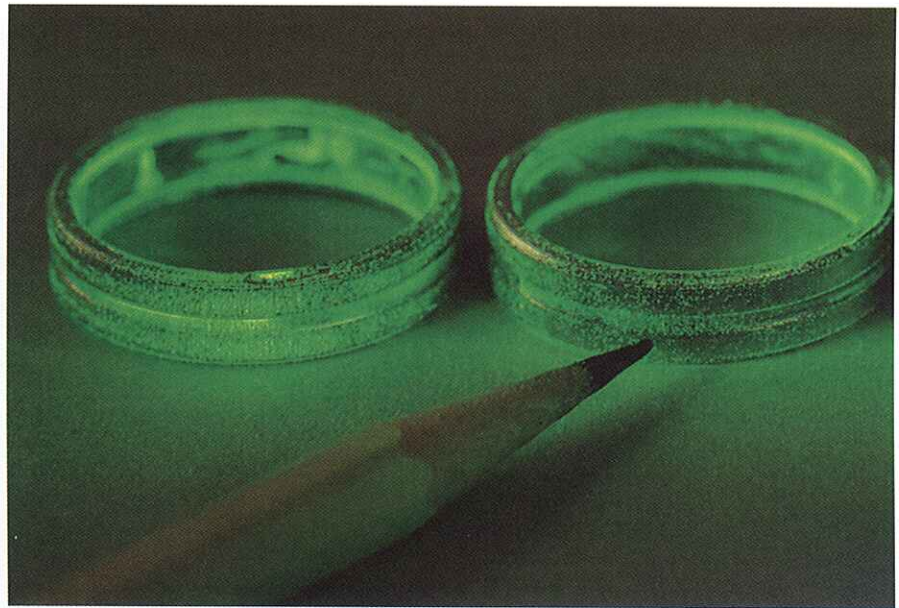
A 30-day-old test bath with the new extended-life agents revealed a microcrack (pencil point) in the roller bearing outer race on the right. The other race was similarly run through a bath containing commonly used materials.
